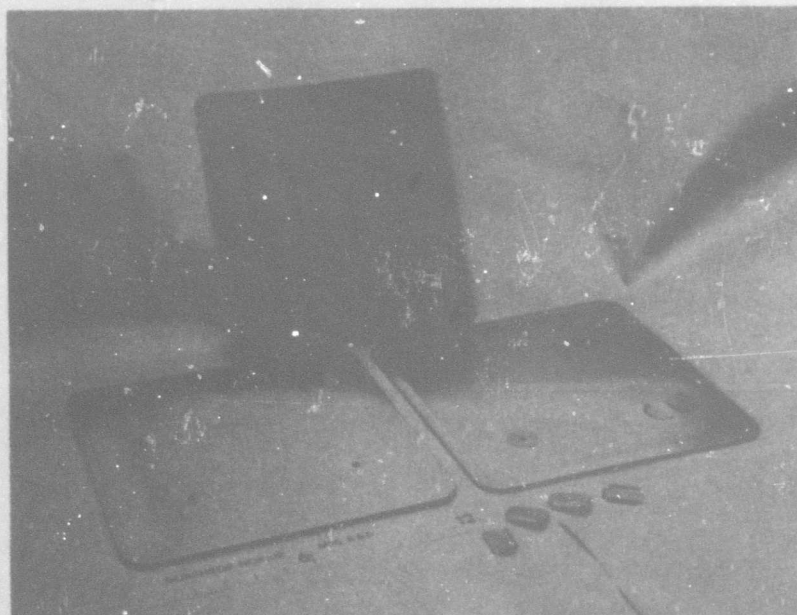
INNER (RIGHT) AND OUTER (LEFT) FORMED HEATSHIELD SKINS WITH CORE, WASHERS, AND PANEL ATTACH CLIPS
